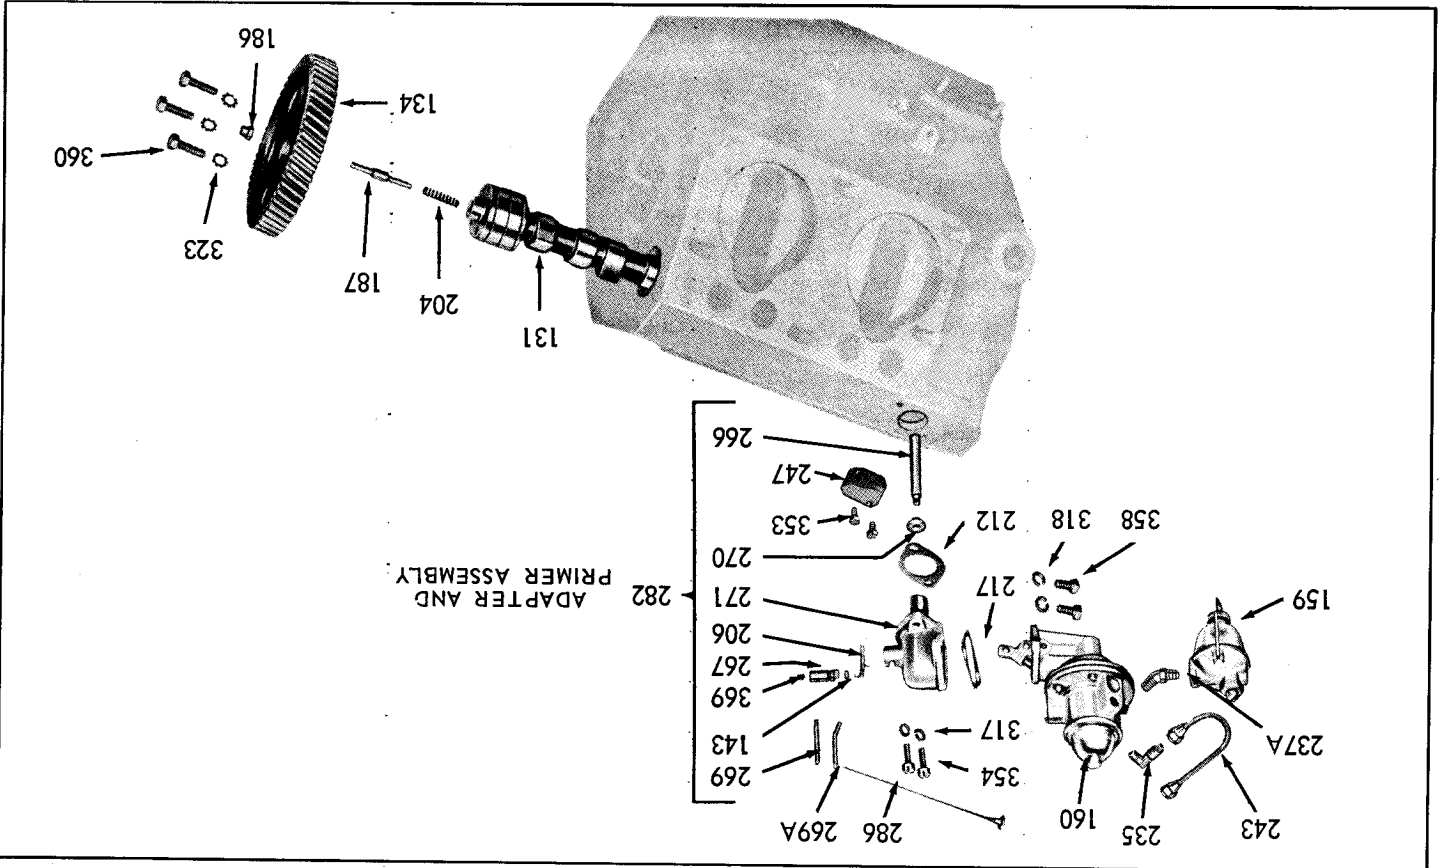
, CAMSHAFT AND FUEL PUMP MOUNTING GROUP
